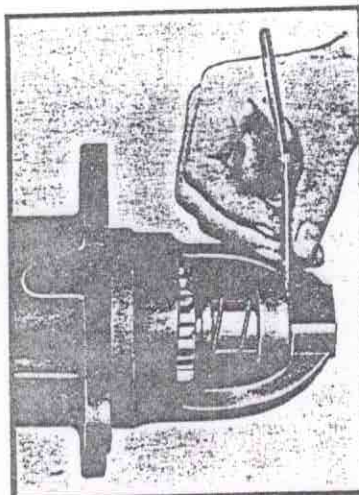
Measuring Bendix drive stop clearance which must be 1/16". Do not compress Bendix spring as this will give an incorrect reading
